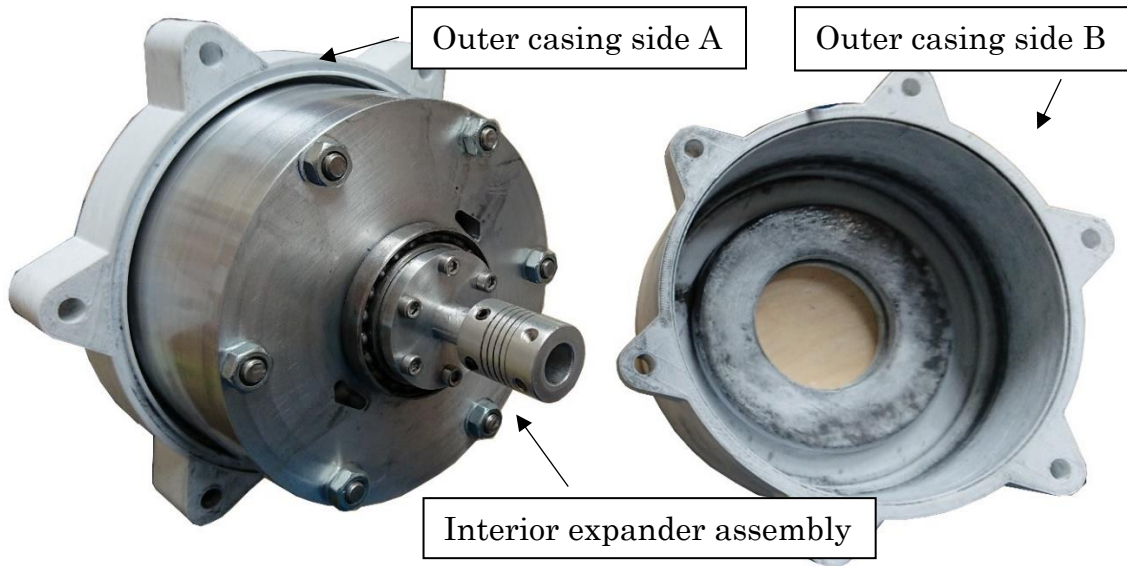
Expander inside the 3D printed plastic casing halves
